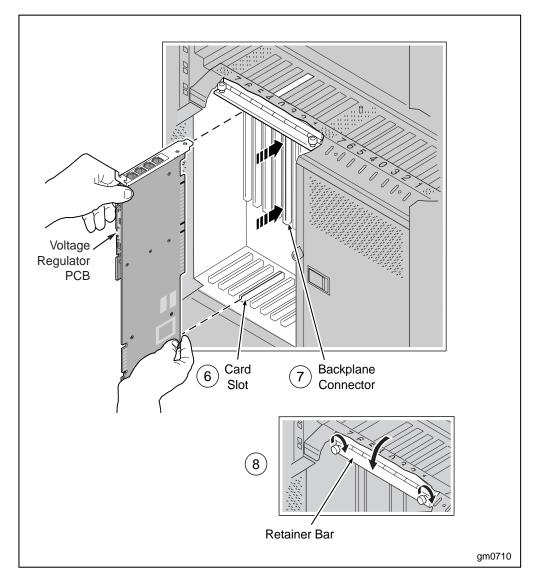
Installing a U916 PCI Card: Steps 6-8
